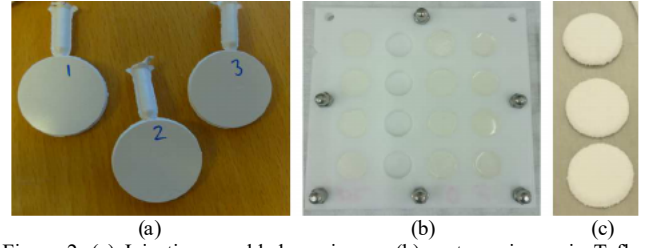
(a) Injection moulded specimens; (b) cast specimens in Teflon moulds; (c) PBF specimens.
